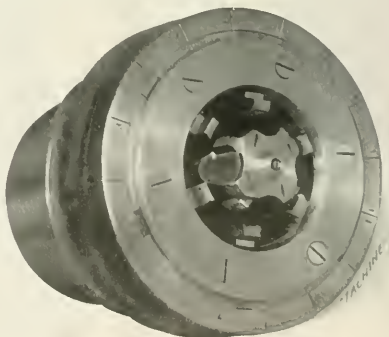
Combination Threading Die and Tap made by the Murchey Machine & Tool Co.
